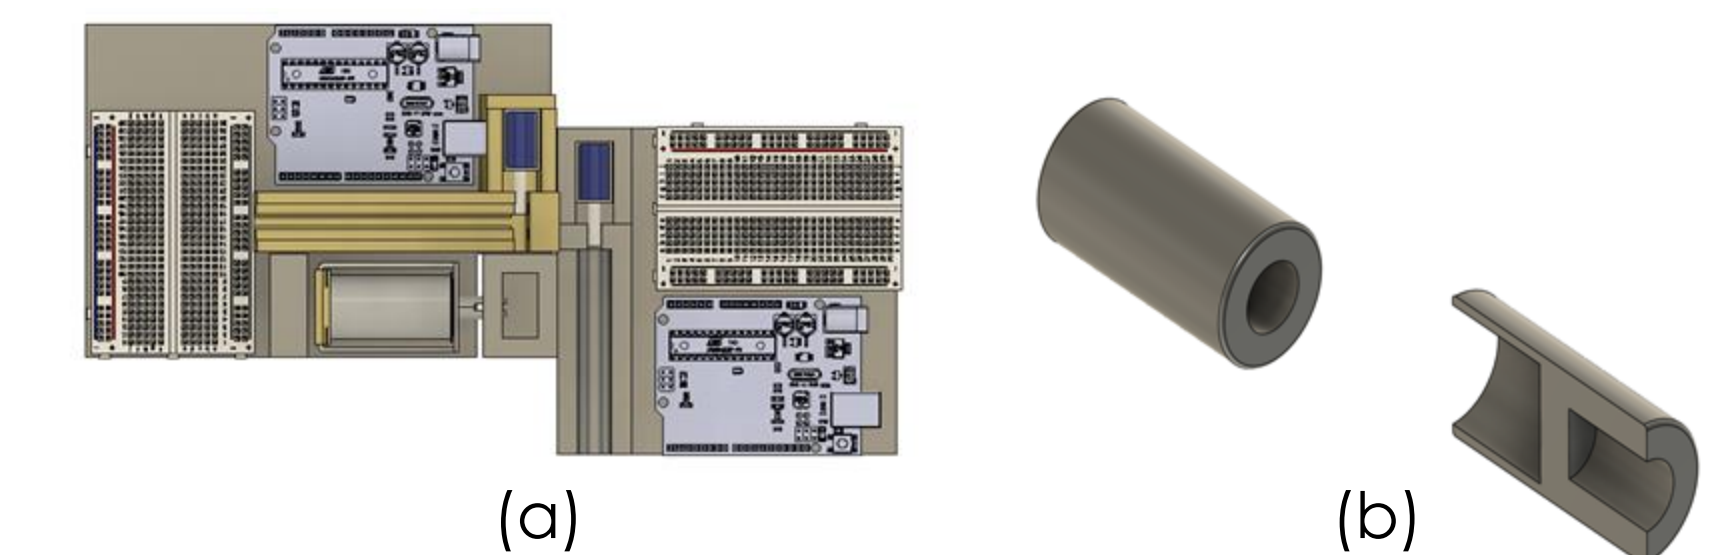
(a) preliminary CAD drawings for the solenoid-driven sabot loaders. (b) CAD of an individual sabot carriage with cross-section.
